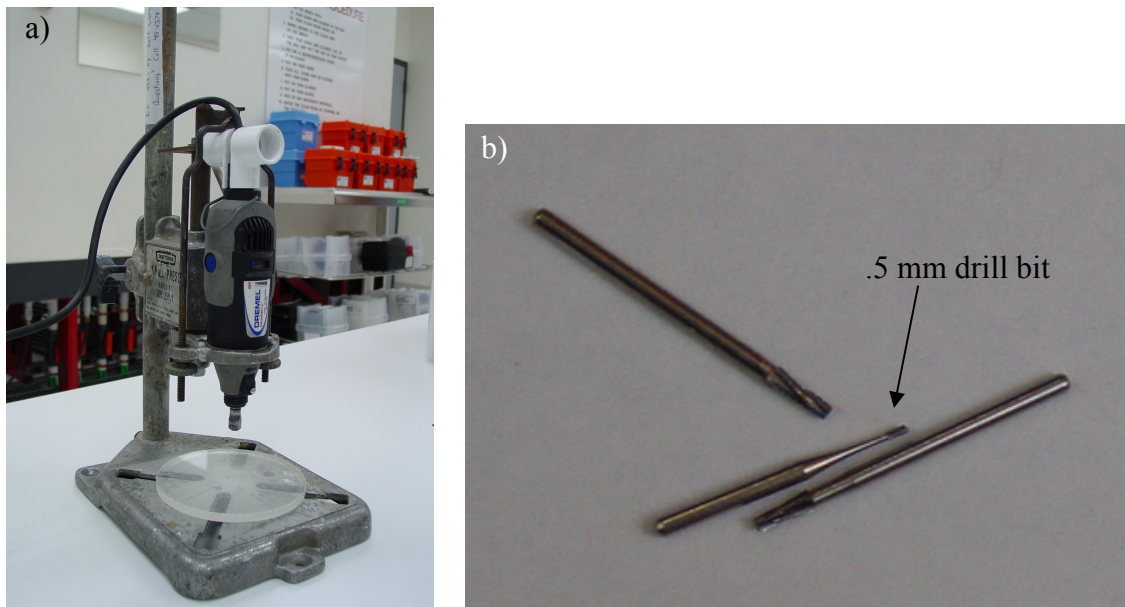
a) A dremel tool mounted in a portable drill press. b) Various drill bits used to drill.
